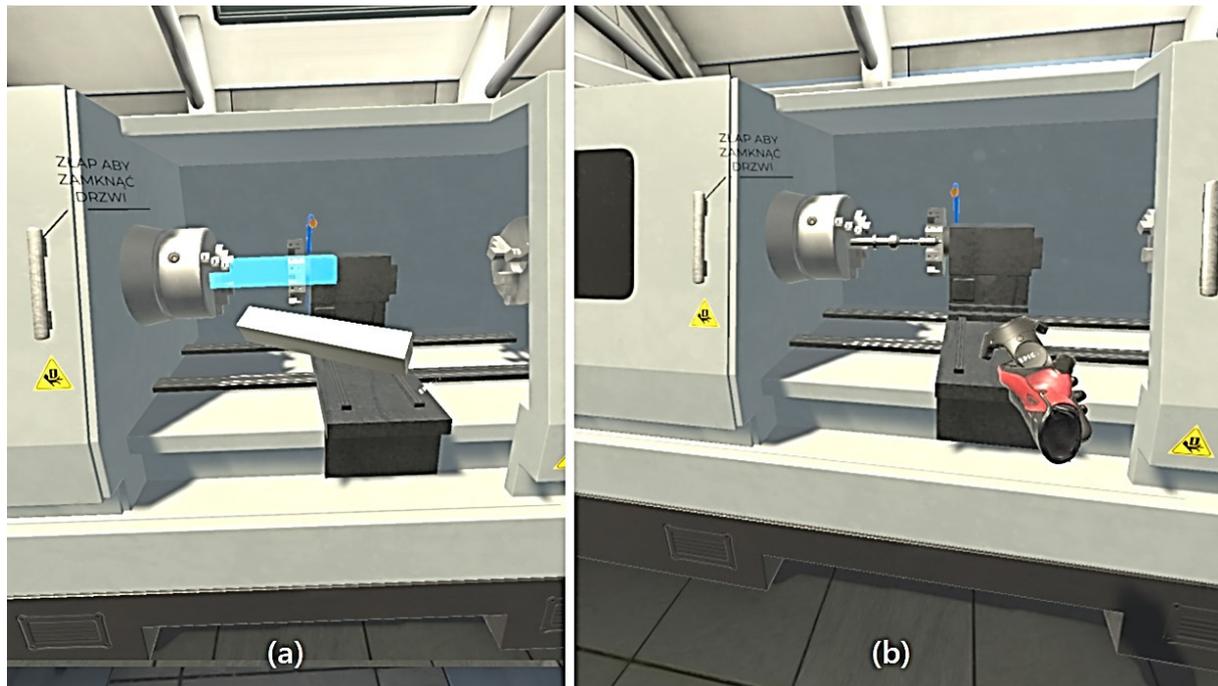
Screenshot of the practical module of CNC production: (a) – placing the detail in CNC machine, (b) – processed detail.
